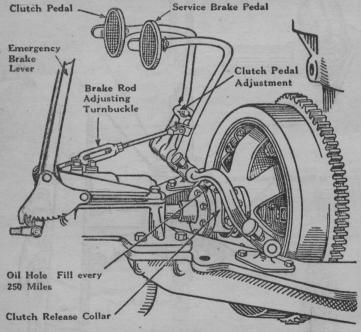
Model Four-Ninety, Superior, G clutch operating mechanism
